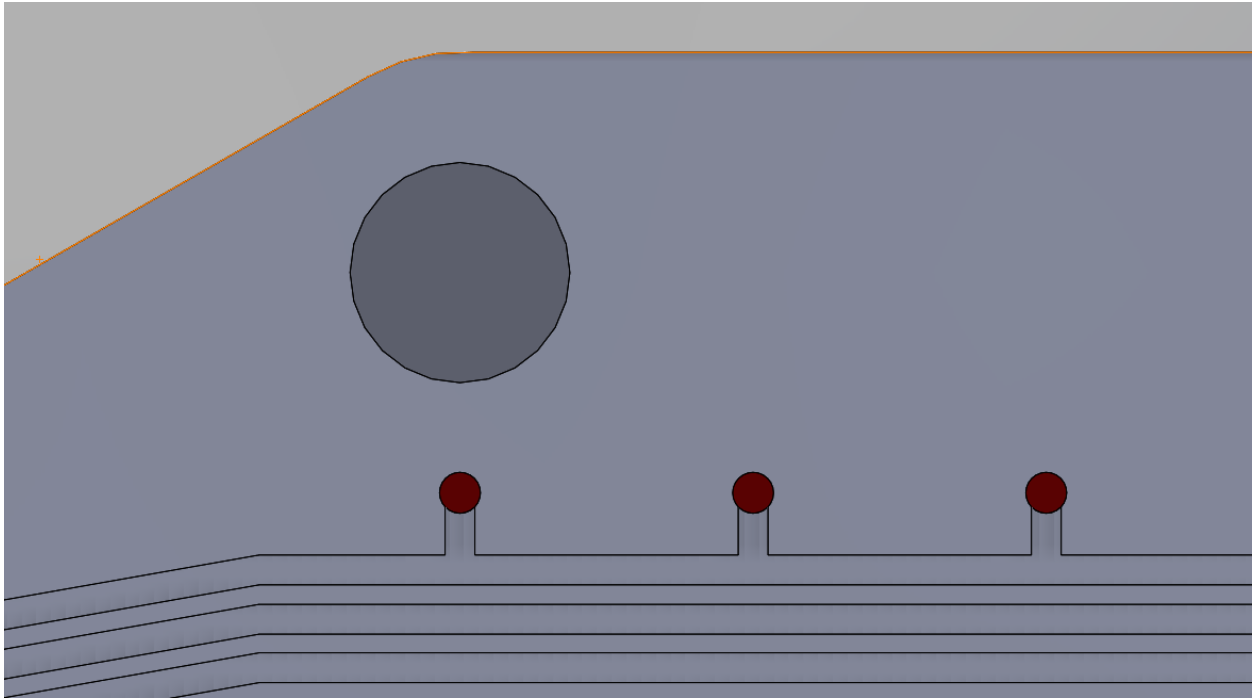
The red area shows the location of the clamp holes, which were drilled through the entire plate with a size 54 drill bit on the CNC mill. The protrusions were milled out of the plate, using a .006" end mill to remove the material between protrusions. Locations for the holes are identical for the primary and secondary molds.
